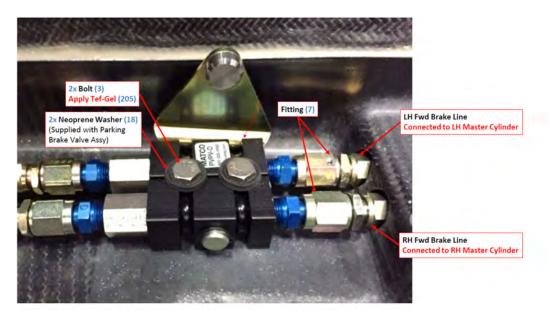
PARKING BRAKE VALVE AND COMPONENTS RELATED INFORMATION:
